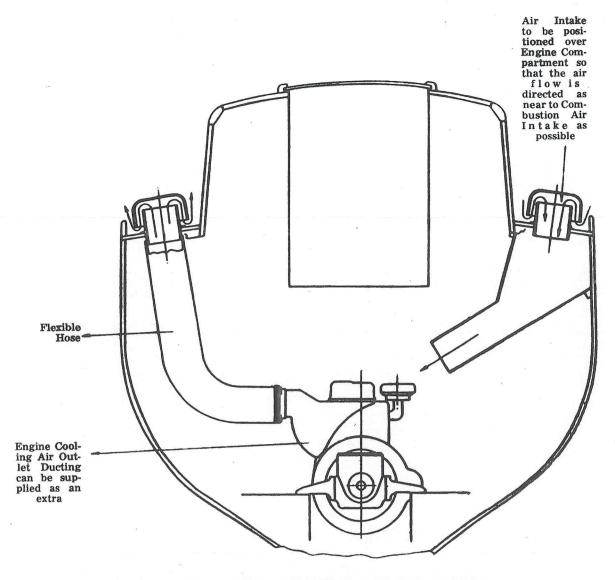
Horizontal Engine Duct adapted for Circular Trunking
